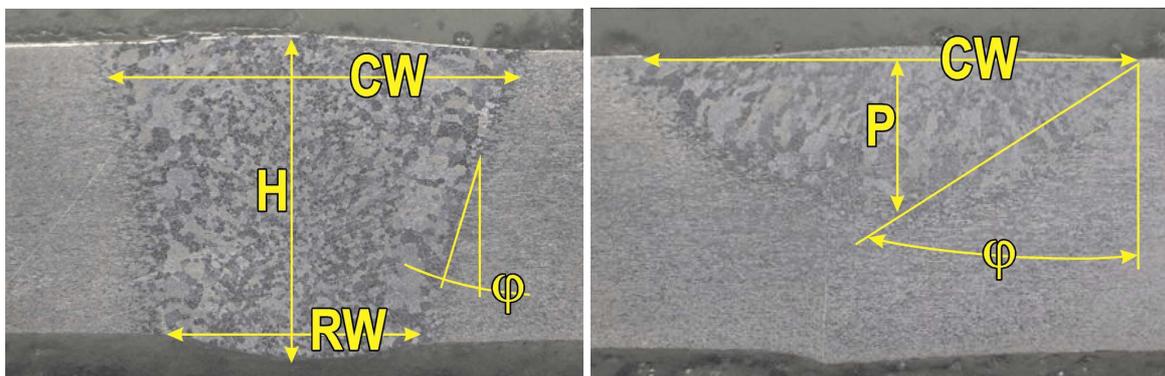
Measures of weld metal geometry of ATIG-welded (left) and TIG-welded (right) joints.
